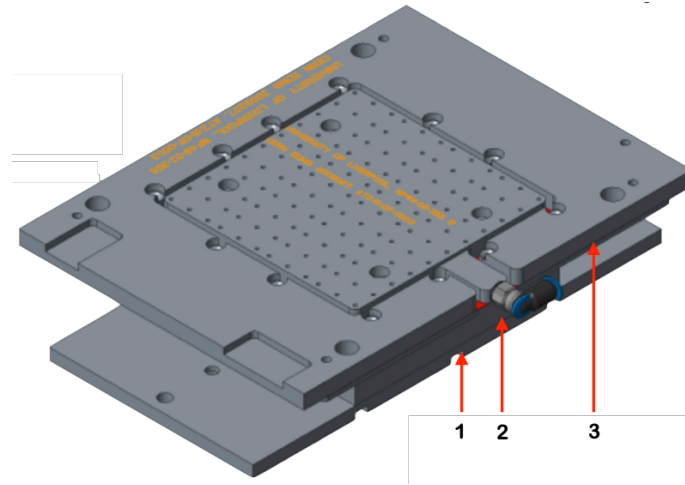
Schematic of the cooling jigs, with the three main parts numbered (1-cooling block, 2-vacuum chuck, 3-Test frame support).
